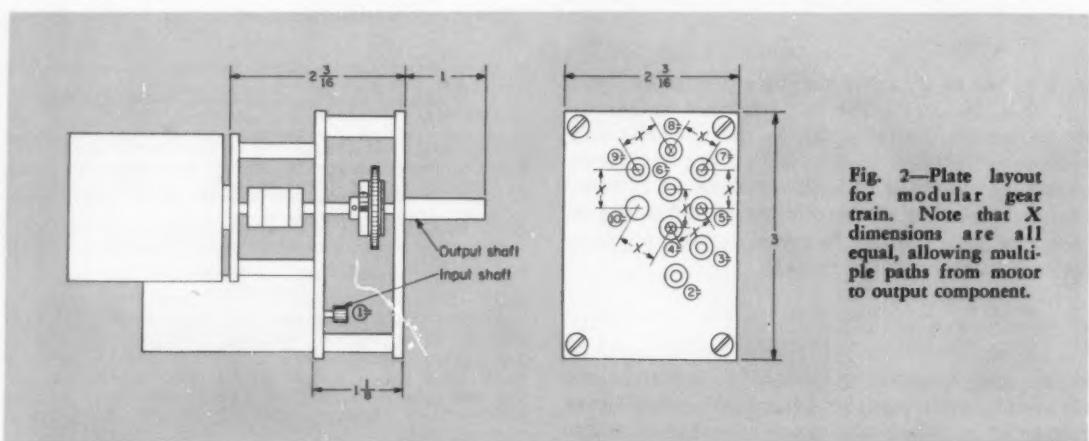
Plate layout for modular gear train. Note that X dimensions are all equal, allowing multiple paths from motor to output component.
